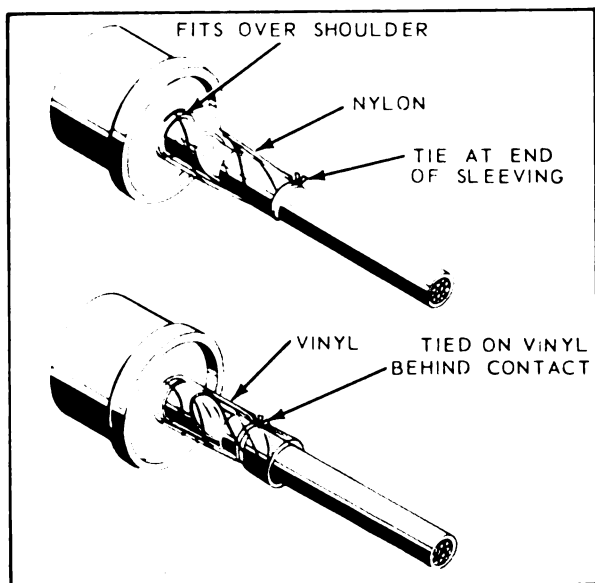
Insulating Sleeving Installed Over Solder Cup
